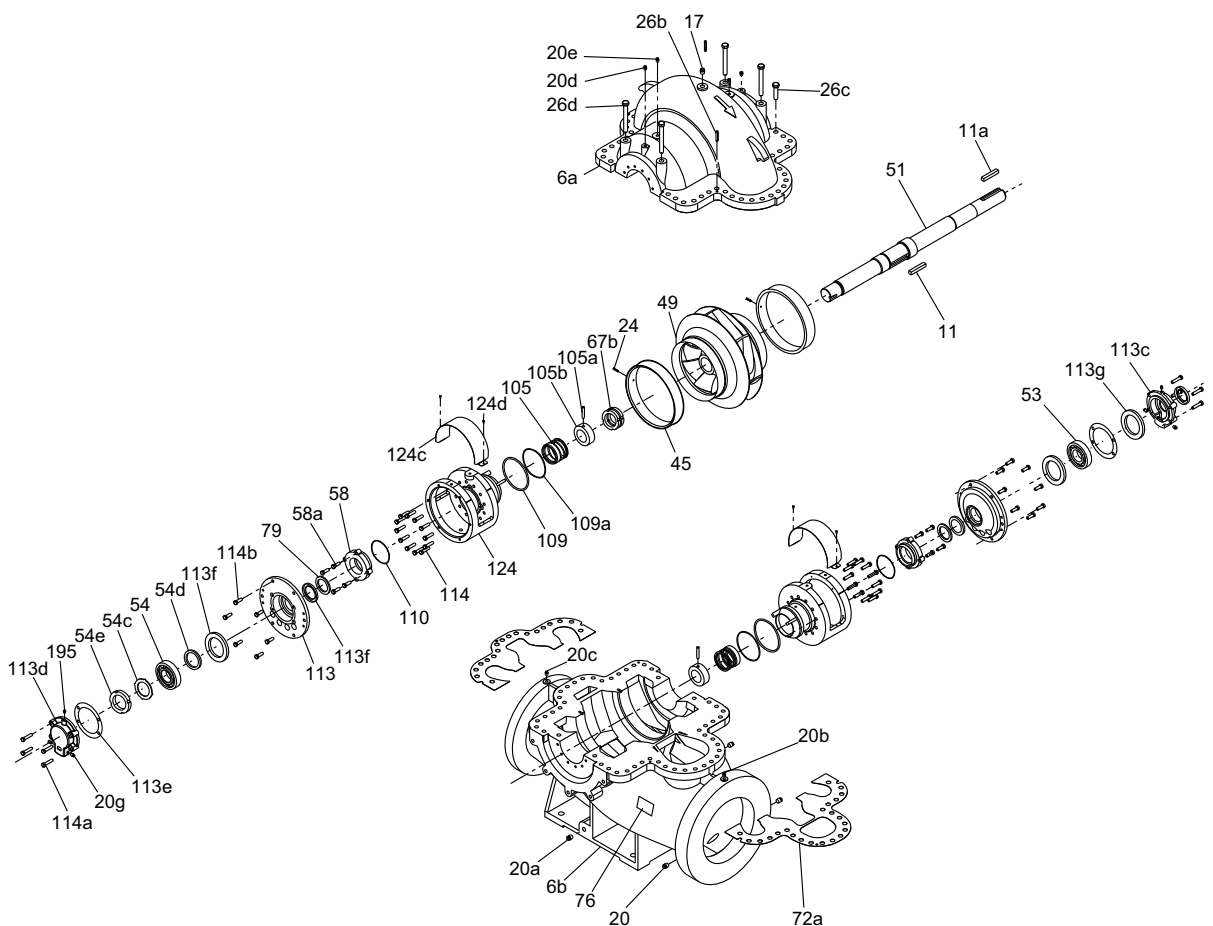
Construction type 2: LS 300-200-489, LS 350-300-508
